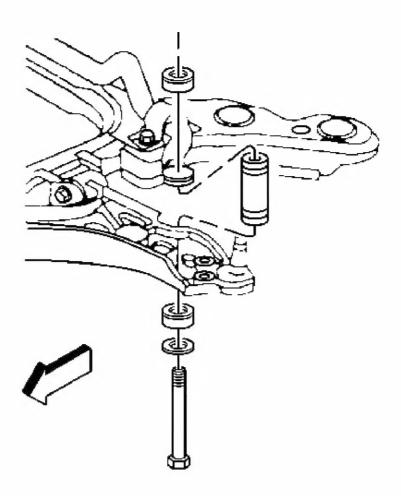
Removing/Installing Stabilizer Shaft Link Bolt Courtesy of GENERAL MOTORS CORP.
